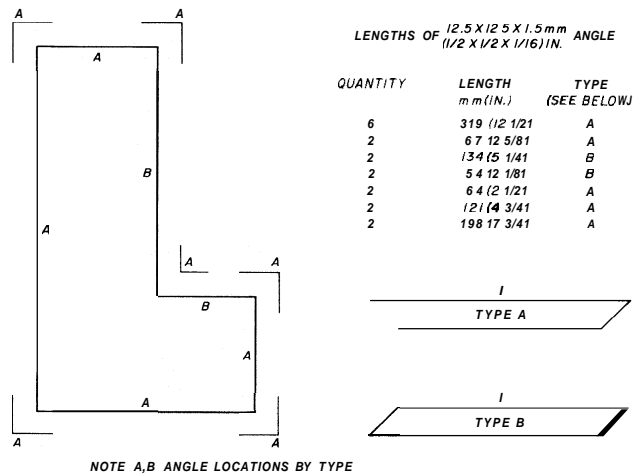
Dimensions of angle stock needed for the first version of rack. Location of the pieces are shown.
